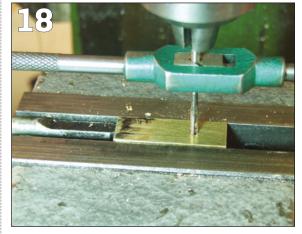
Tapping the M2 mounting holes in the valve body using a spiral flute tap.
